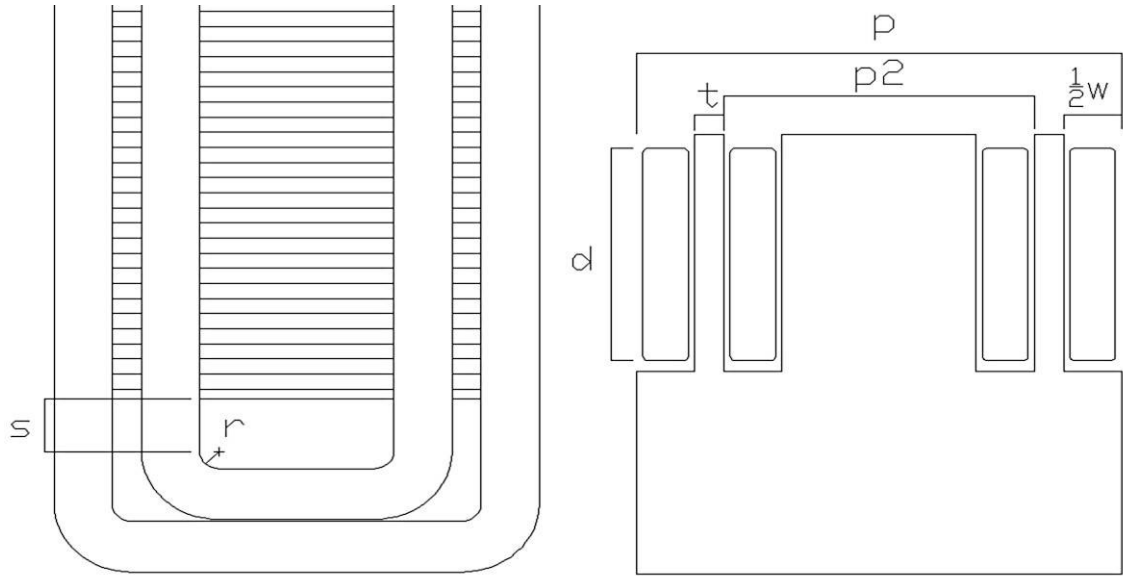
Coil dimensions for determining end turn inductance of a 2 coil concentric machine
